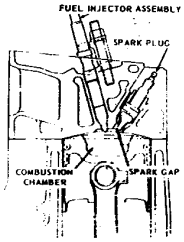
Ford experimental Proco diesel engine with open combustion chamber and spark ignition.
